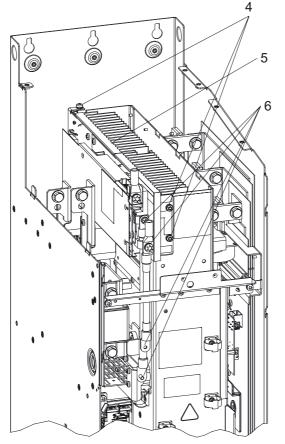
Installing a Braking Module in a Power Module, frame size GX – steps 4 - 6
